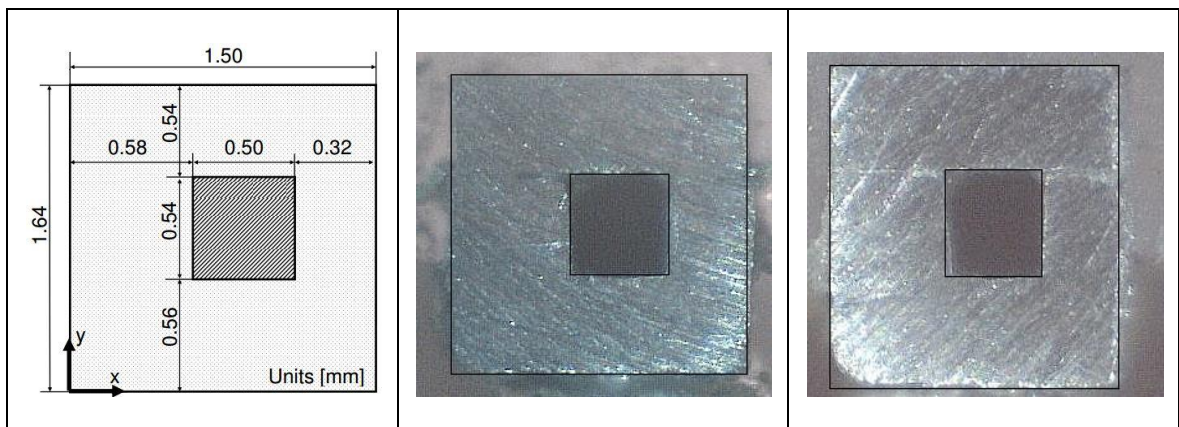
Test Section 2: (a) actual measured channel dimensions, (b) photograph of inlet side of the channel and (c) photograph of the outlet side of the channel
